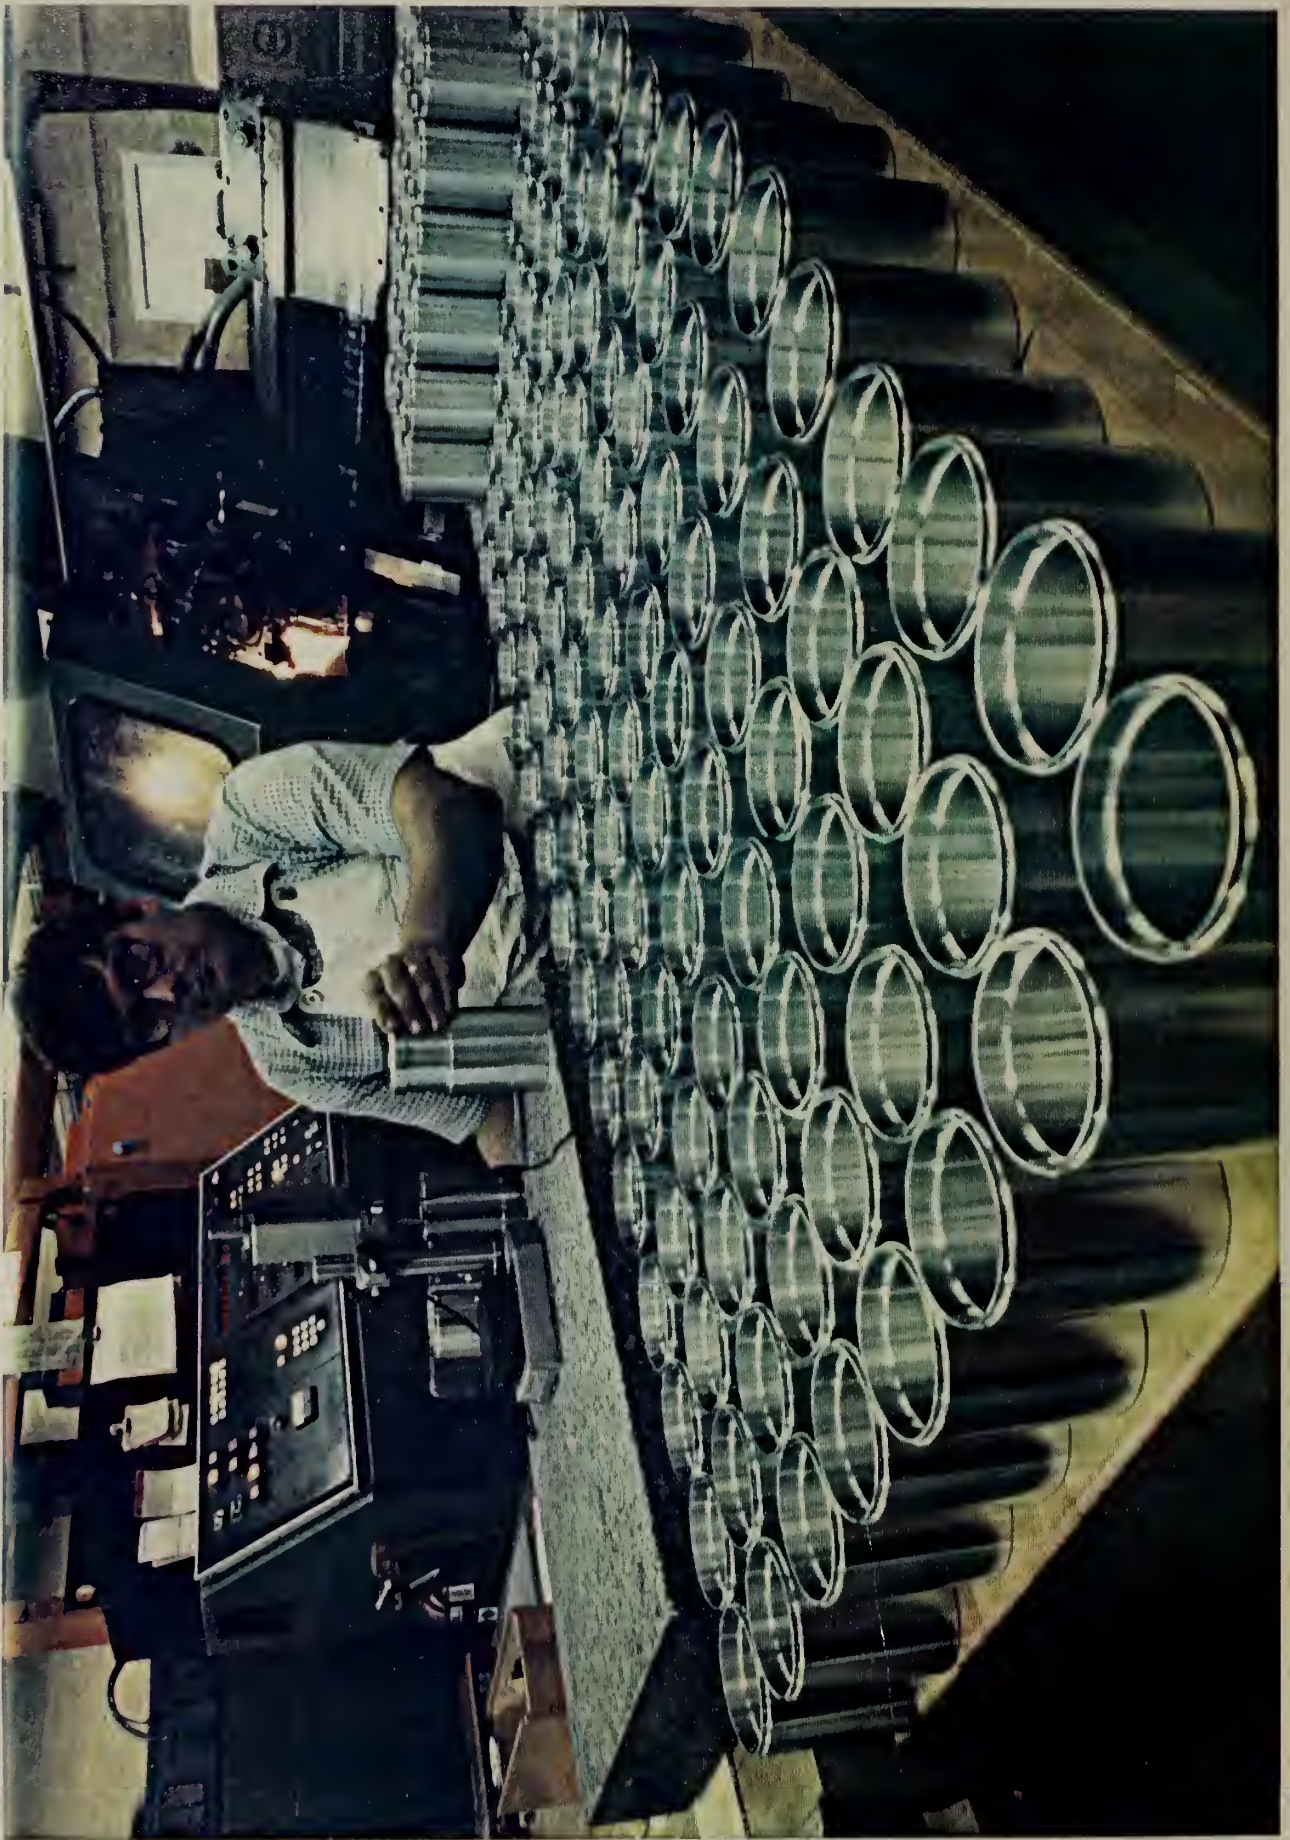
An Array of Outer Cans and the Inner Plug Being Inserted Into One of the Outer Cans
